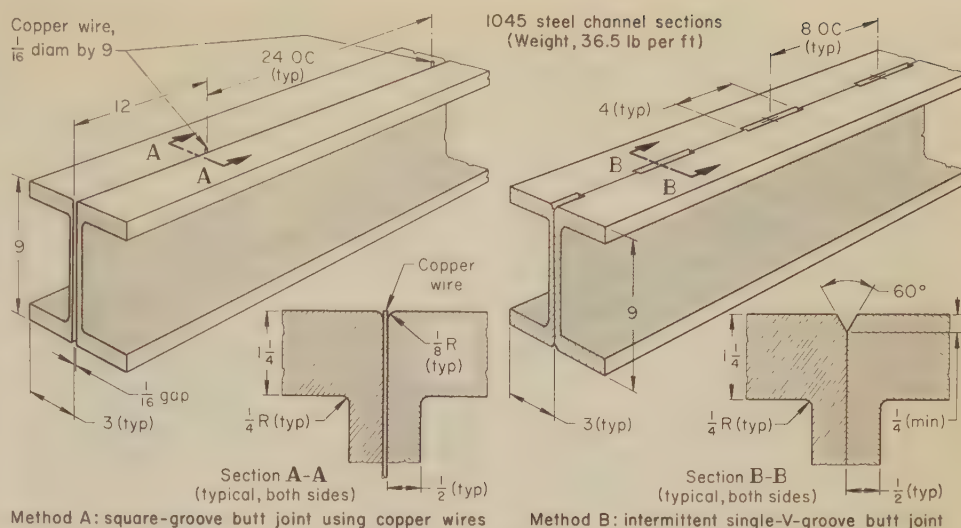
Two methods of joint preparation for shielded metal-arc welding of heavy channel sections back-to-back, to avoid weld cracking due to joint restraint and insufficient weld ductility (Example 181)
